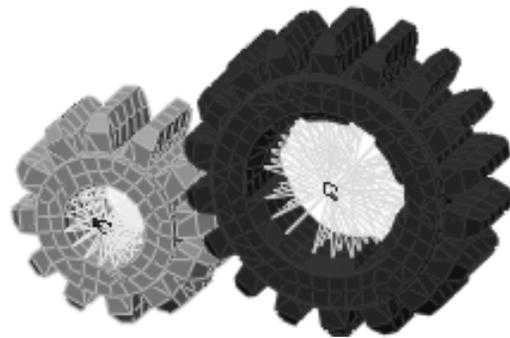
Modeling of main and pinion gear with respect to the torque at a pin for each gear.
